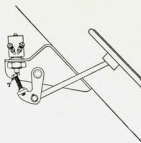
Screw "T" Should Just Contact Switch Plunger When Throttle is Just Wide Open
